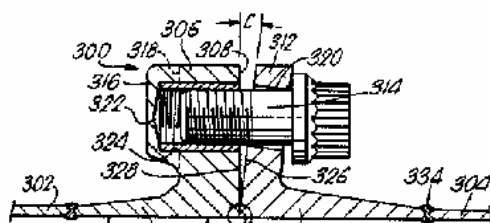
US Patent: 5230540, 'Fluid-Tight Joint With Inclined Flange Face
